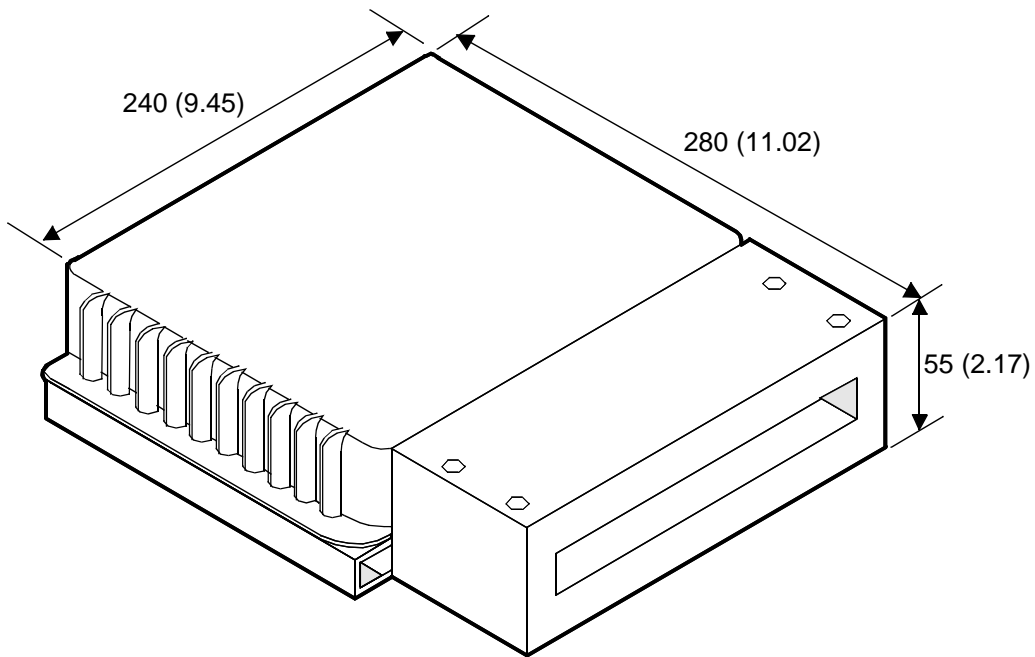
Dimensions of the RU mounting rack (shown with RU mounted)
